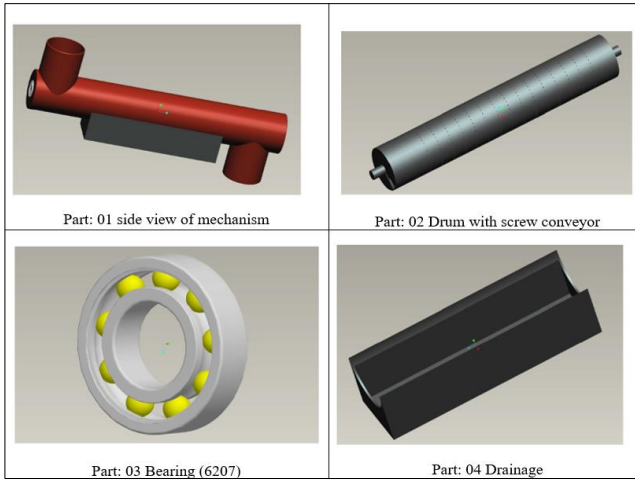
Detailed drawings of chip removal mechanism (Pro Engineer) [15]
